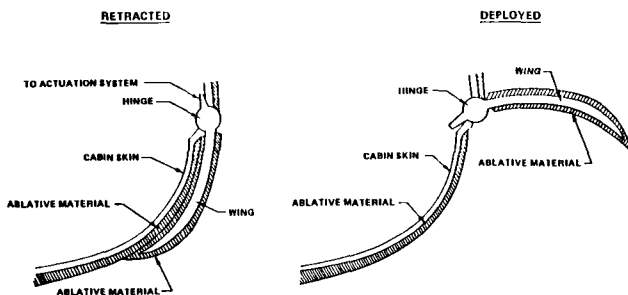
Pod Capsule Wings in Retracted and Deployed Position
